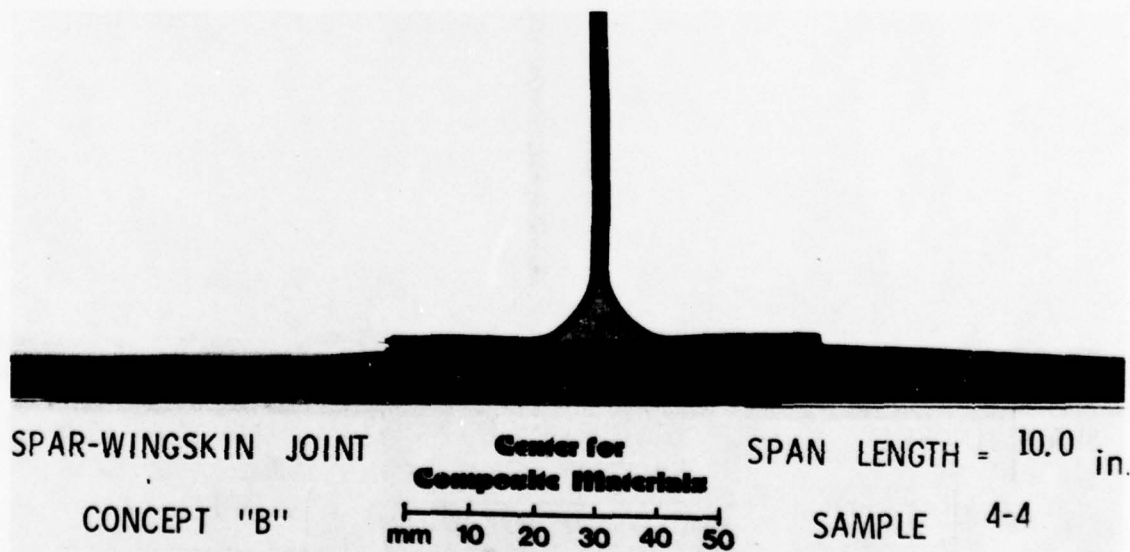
Specimen 4-4; Failed (Concept B; 10.0 inch span)
